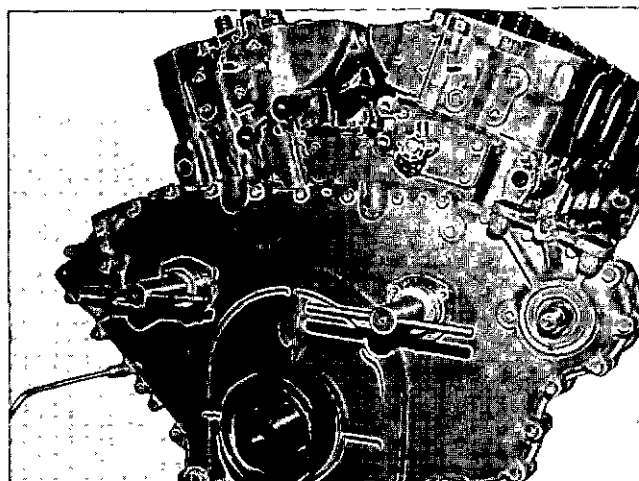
, V414150. ST-575 Guide Mandrels, installed
